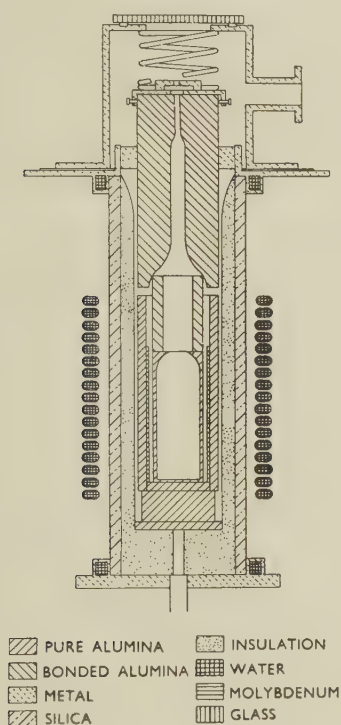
Internal Construction of the Vacuum-Melting Furnace.
